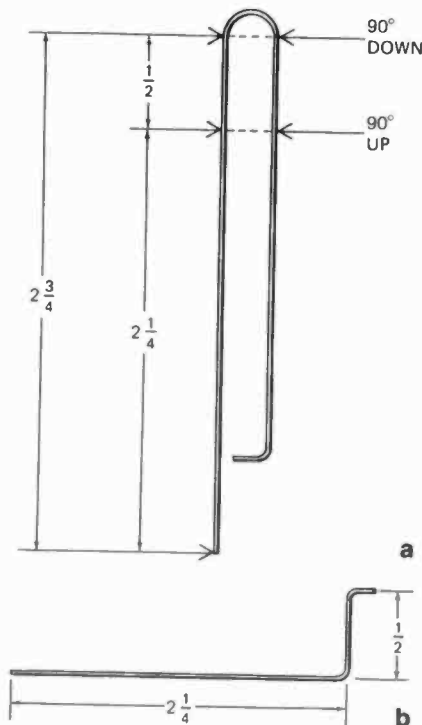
THE BASIC KEY SPRING (a) is formed from music wire. Make 36. For the black keys, take 15 springs and make 90° bends 1/2 inch apart at the 2 1/4 and 2 3/4 inch points so side view is as shown at b.
